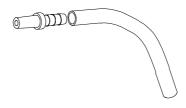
3 Attaching the adapter Luer cone to the hose
